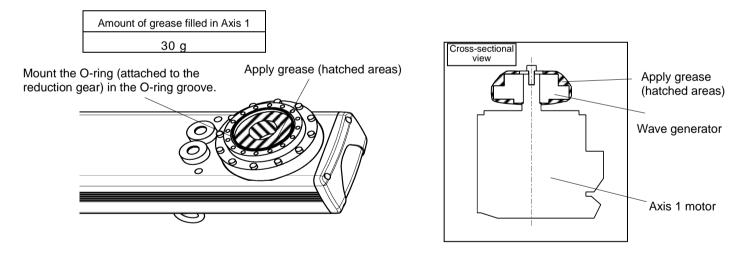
Application of grease to axis 1 reduction gear (KHL-500, KHL-600, KHL-700)
